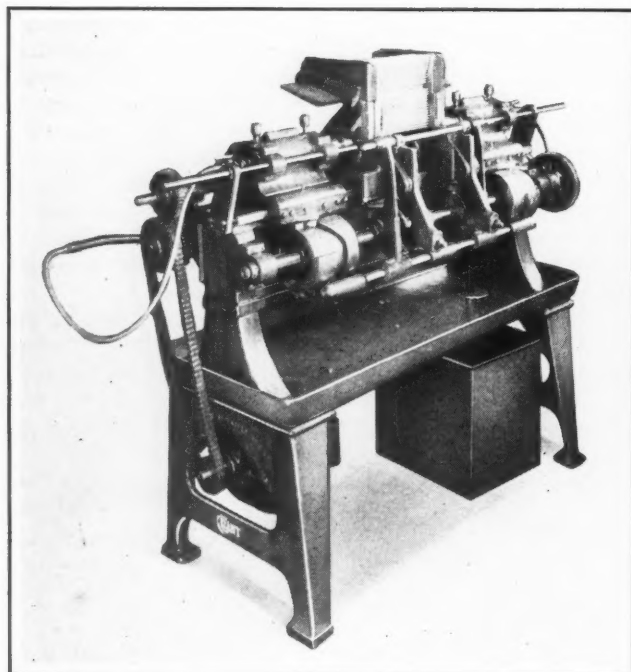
Grant Double-end Automatic Machine for Hollow-milling, Threading and Drilling Operations
